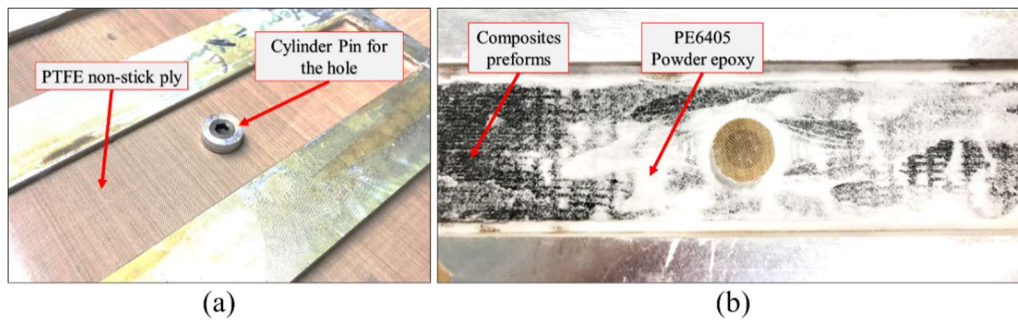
(a) The aluminium mould, and (b) the open-hole preform with sprayed powder epoxy
